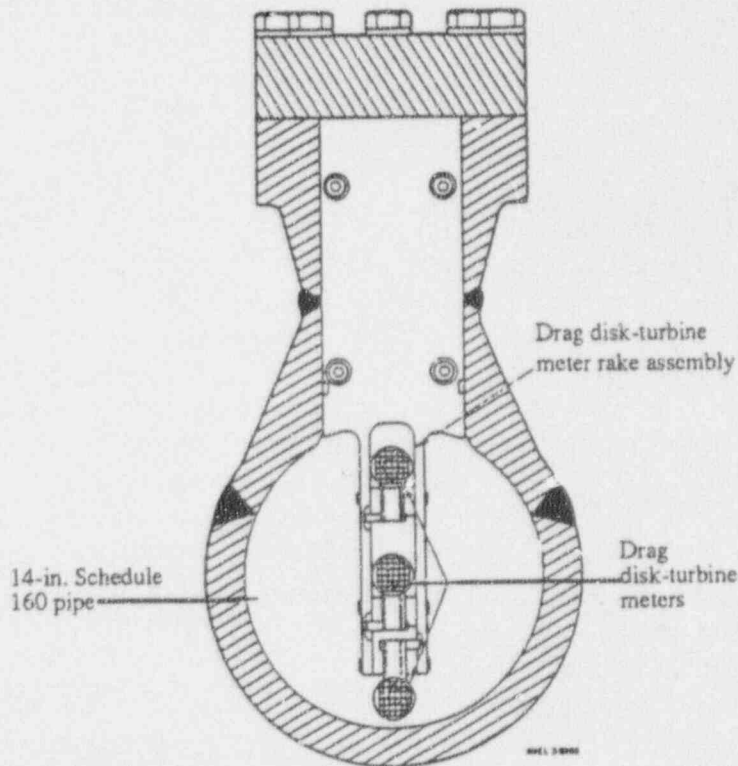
Drag and Disk-Turbine (DDT) assembly.
